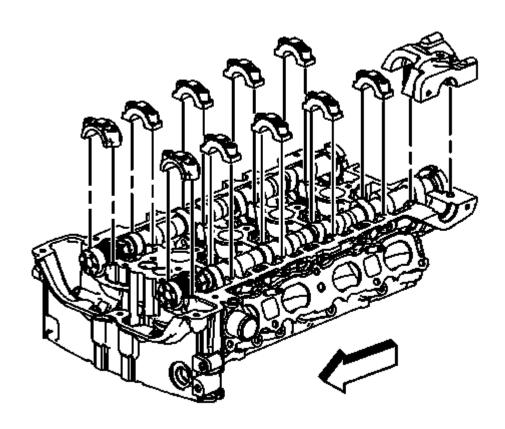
Exhaust/Intake Camshaft And Caps Courtesy of GENERAL MOTORS COMPANY
